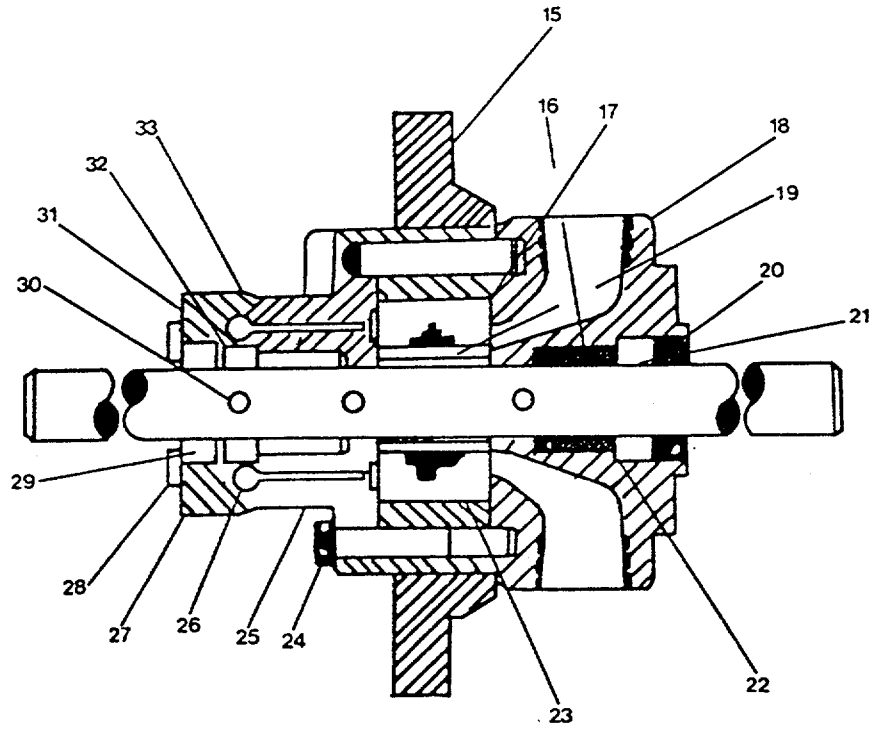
A PUMP, HAND REMOTE H-12-P-10B1
